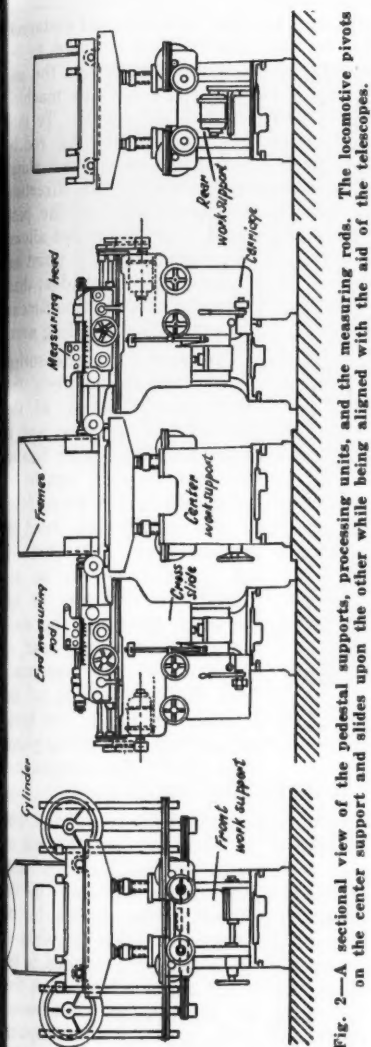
A sectional view of the pedestal supports, processing units, and the measuring rods, on the center support and slides upon the other while being aligned with the aid of the telescopes.
